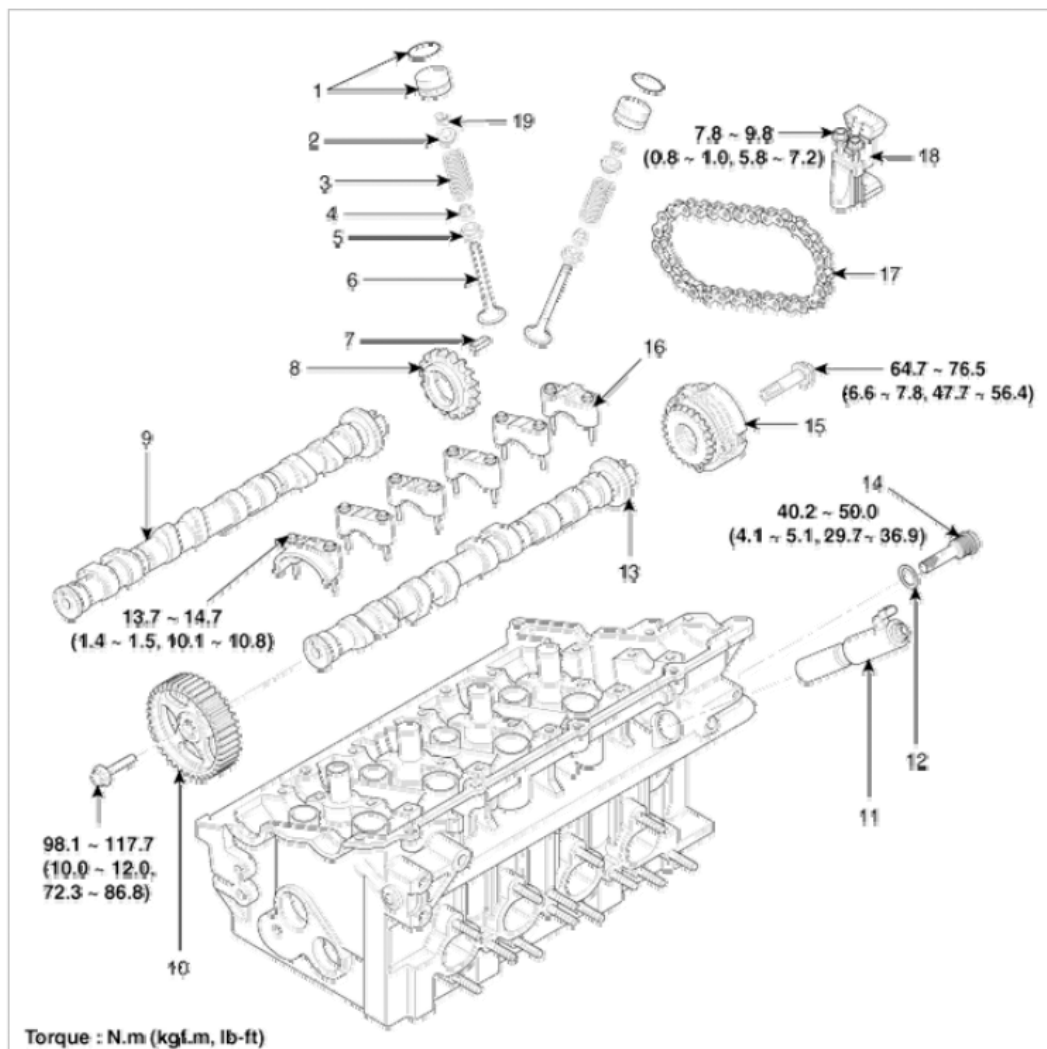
Identifying Cylinder Head Assembly Components With Torque Specifications (1 Of 2)
